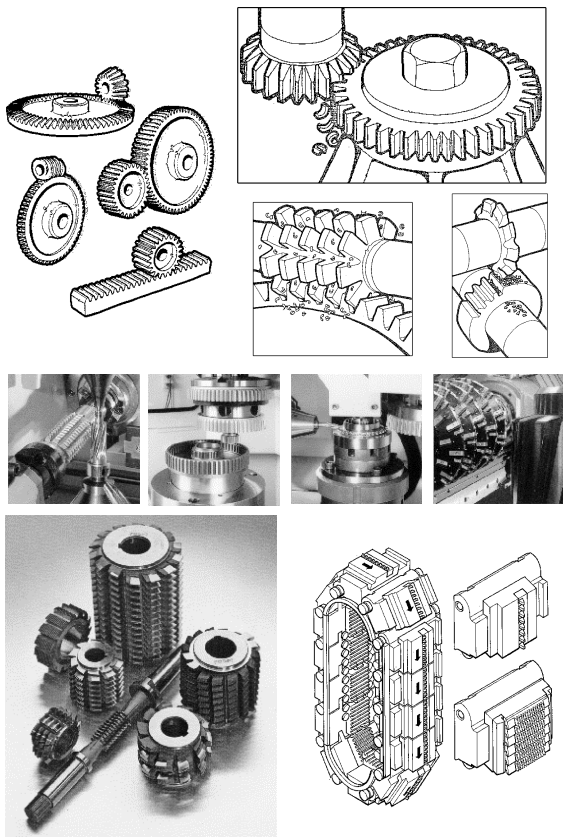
The basic types and methods of serration, the basic and up-to-date tools for serration machining
